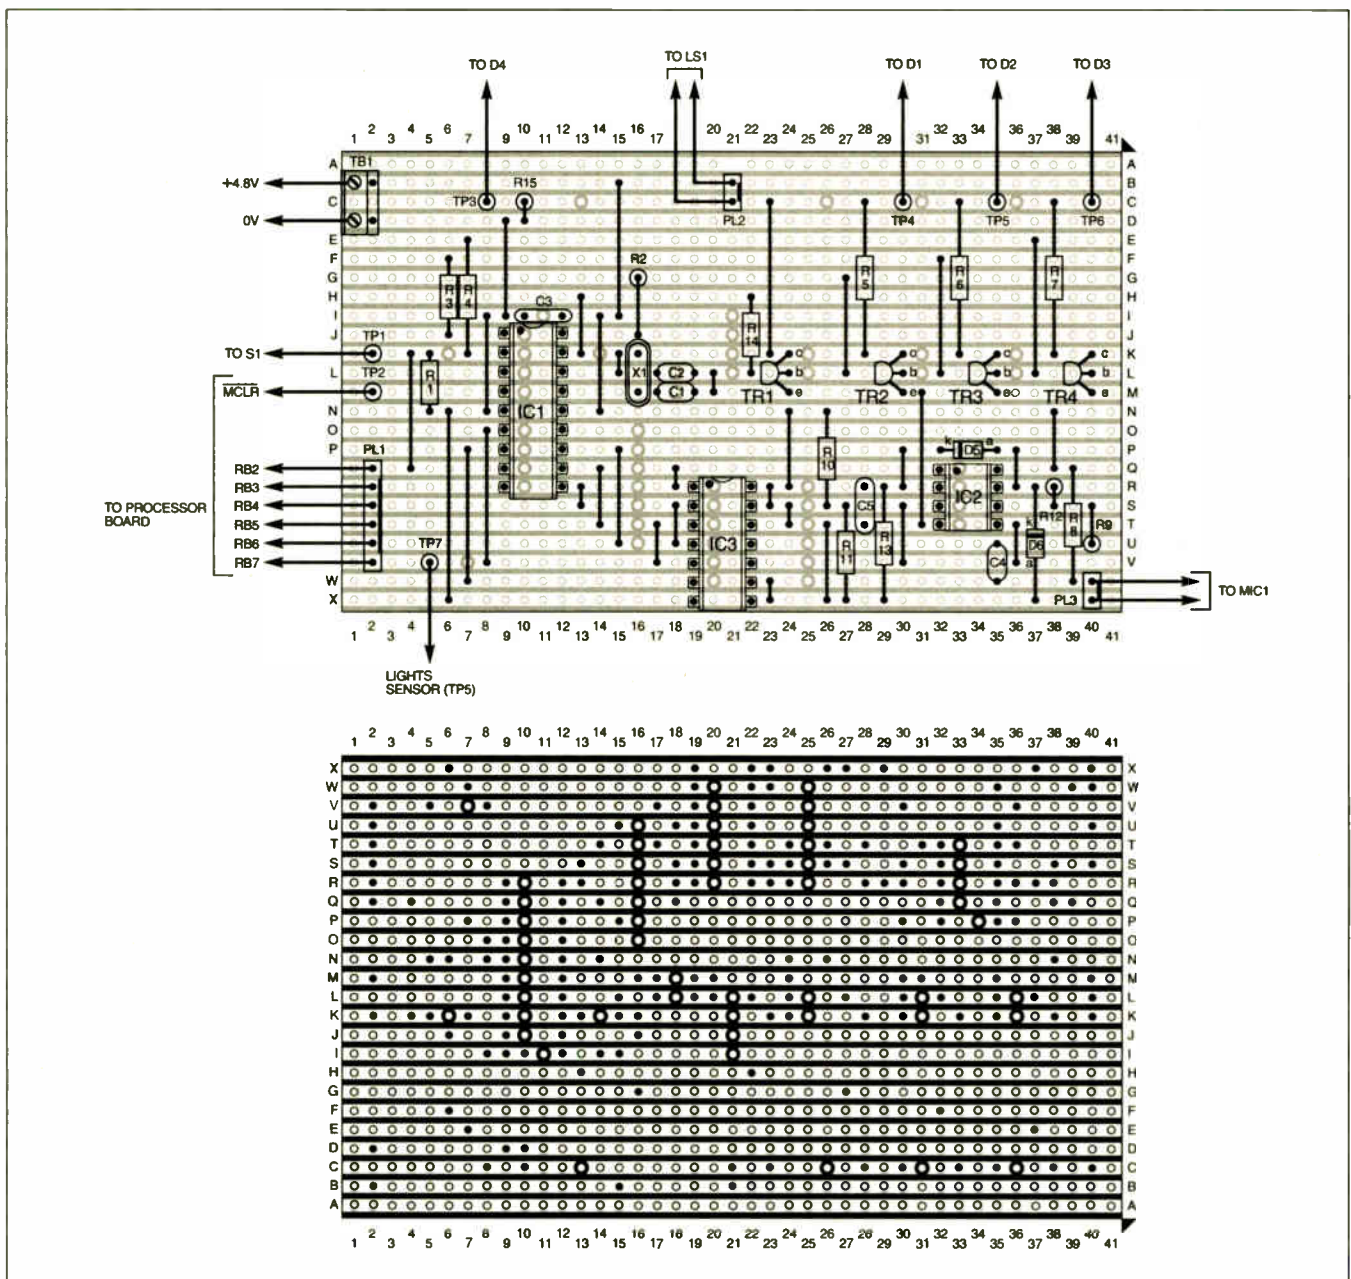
Stripboard component layout, wiring and details of underside copper strip break for the AO circuit board
